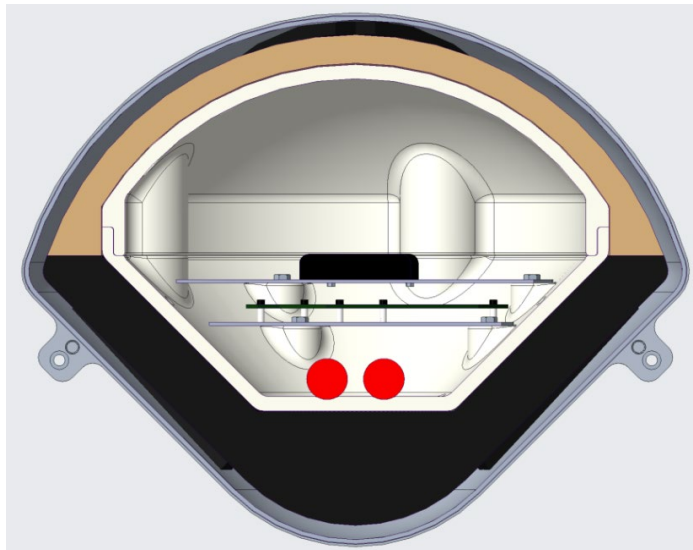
KREPE capsule installed in a KREM RF-shielding housing (gray outer shell)
